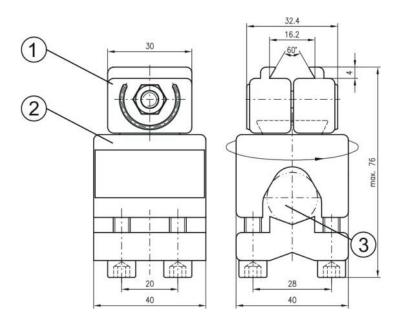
Dimension drawing BE 901 FA-002 mounting device (all dimensions in mm)
